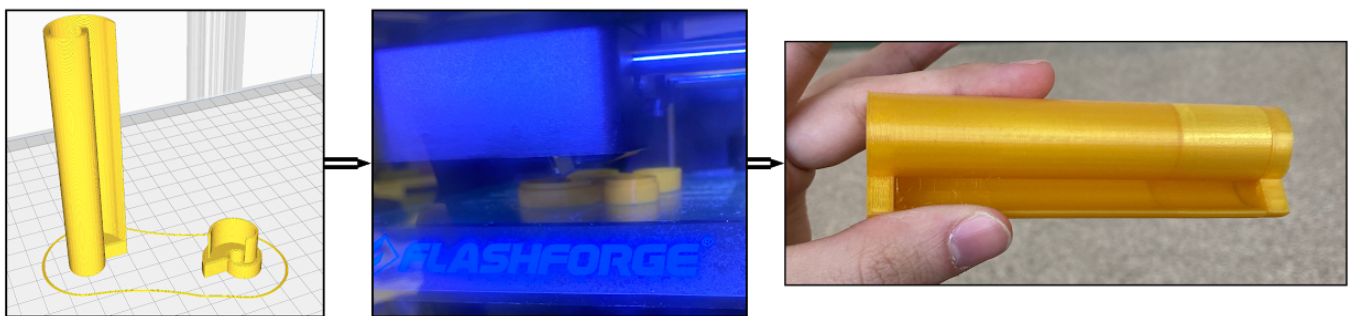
Additive Manufacturing Process, Slice (Left), Print (Mid), Assemble (Right)
